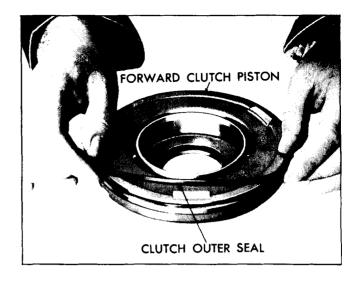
E-118 Removing or Installing Clutch Piston Seals
